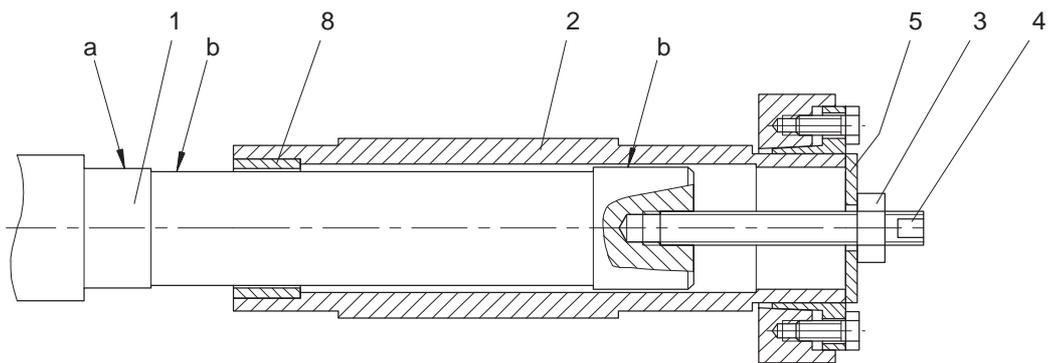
Mounting hollow shaft and shrink disk
